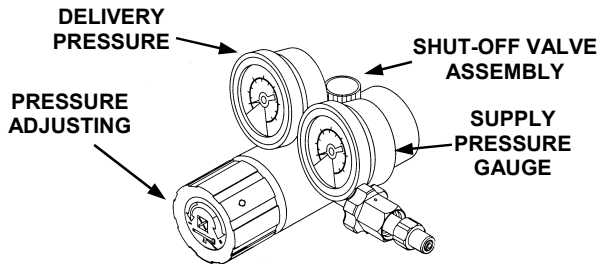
Piston Type Pressure Regulator Controls and Gauges
